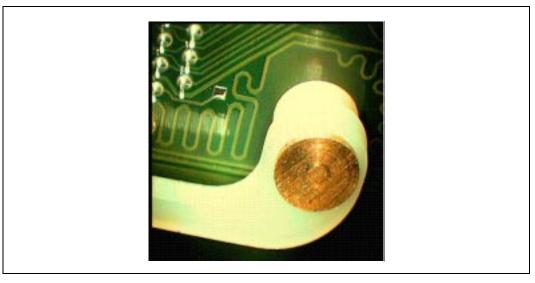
Attach Mount Installed in Motherboard, Bottom View
